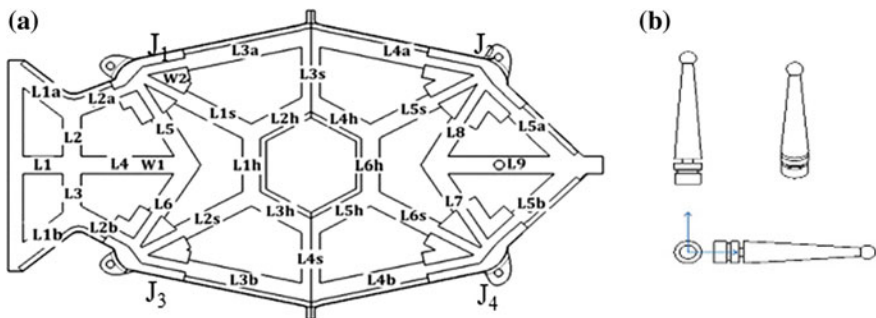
Two-dimensional orthographic view of the a game board b handle
